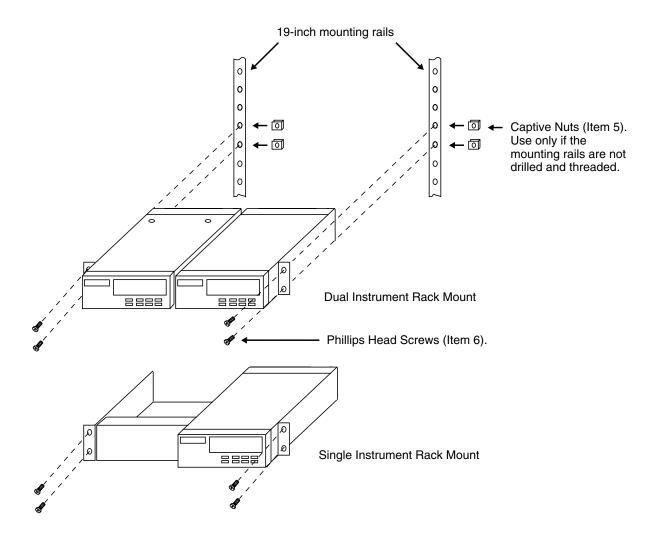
Mount the Assembly into the 19-inch Equipment Rack
